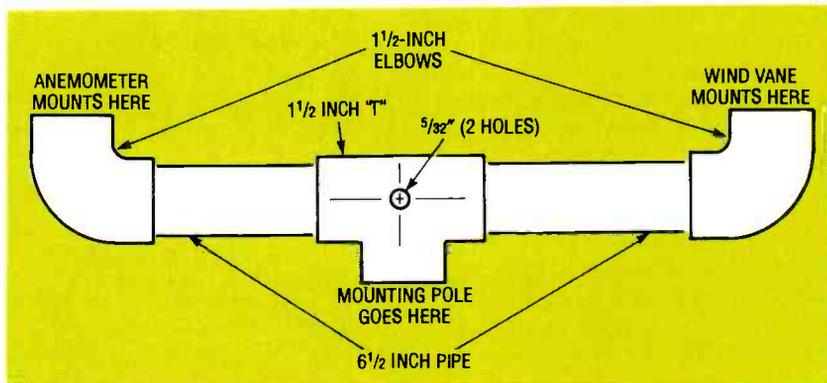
WIND INSTRUMENT MOUNTING. A simple, yet sturdy mount for the wind instruments can be made from PVC pipe.
